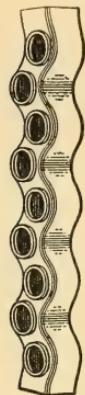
Forged Header for Babcock & Wilcox Boiler.
